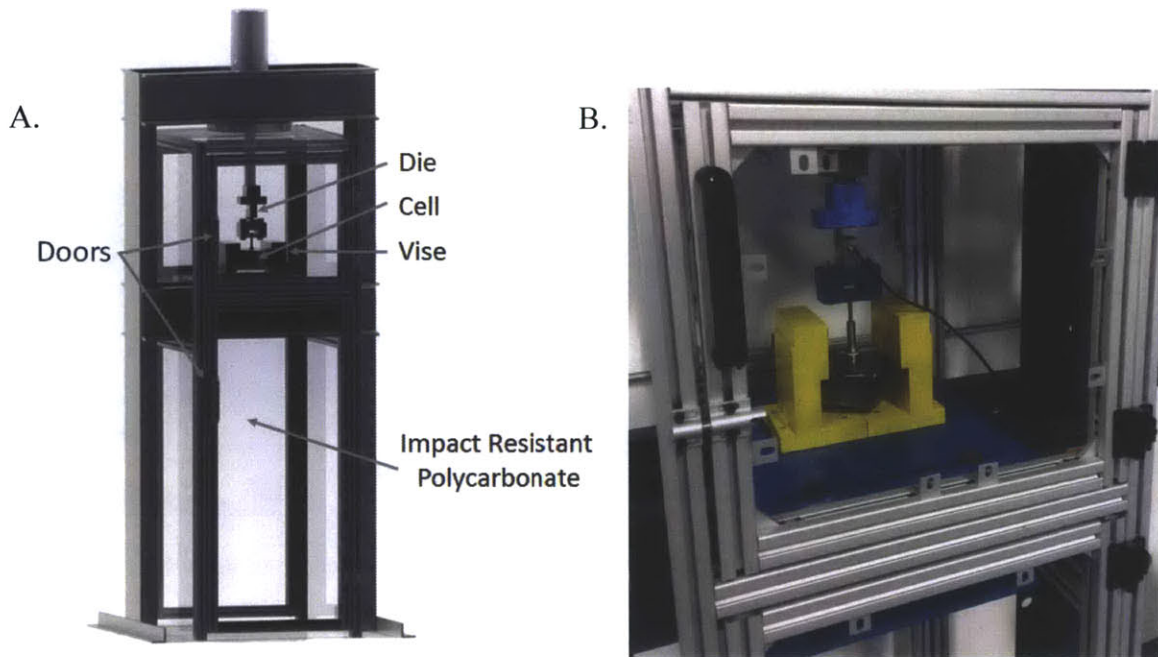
Press and Enclosure for Seal Removal A. Rendering of the Process Containment B. Implemented Design
